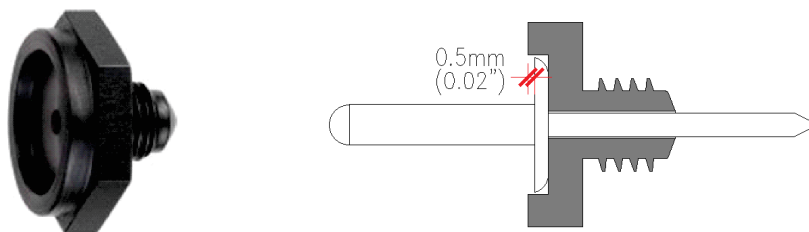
Constricting nozzle, to be screwed into the riveting tool mouth
